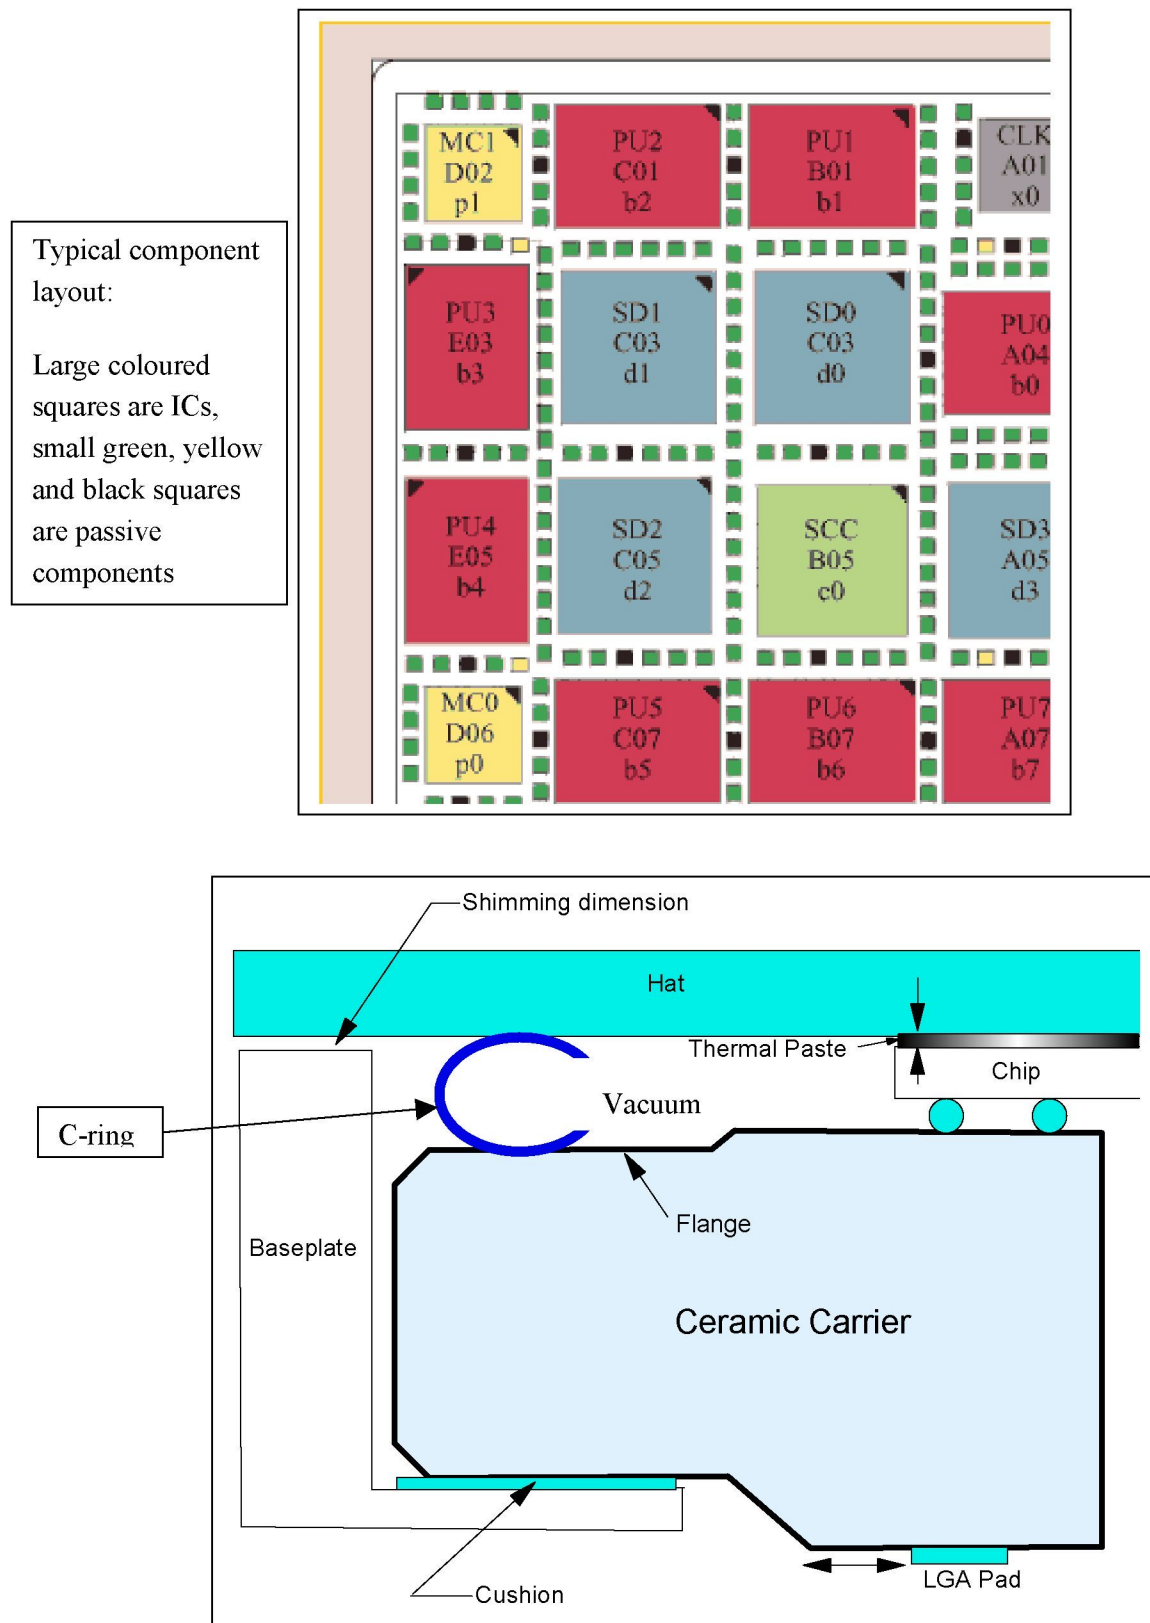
Thermal Conduction Module, component layout and schematic cross-section
